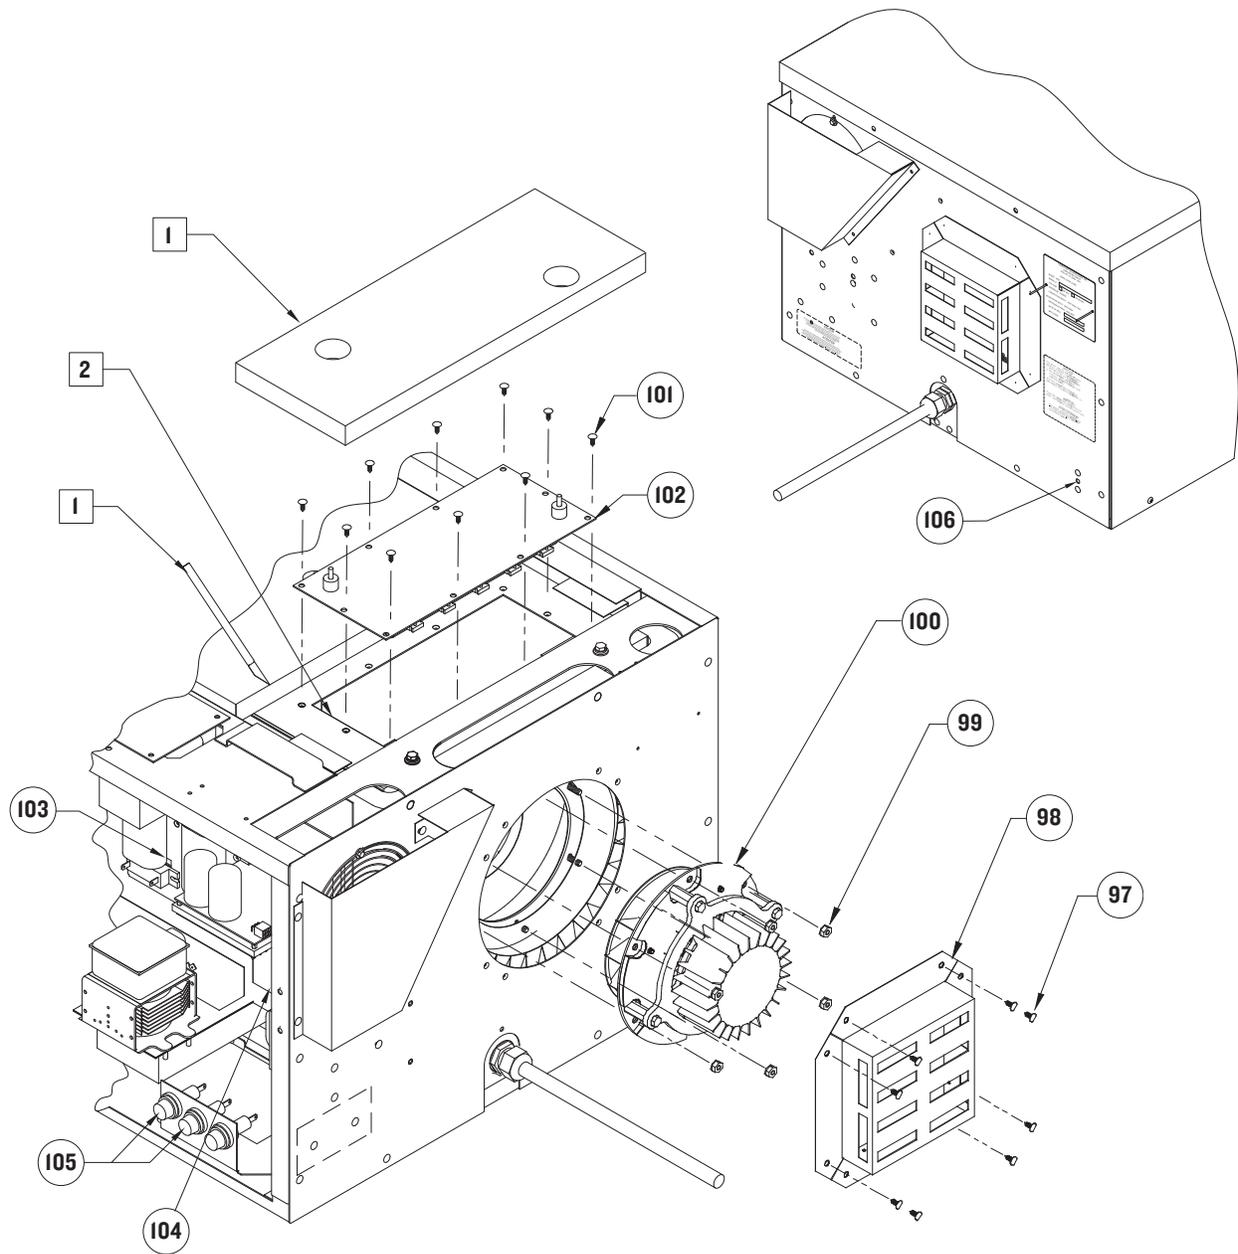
CONVECTION CIRCUIT ASSEMBLY AND PARTS
